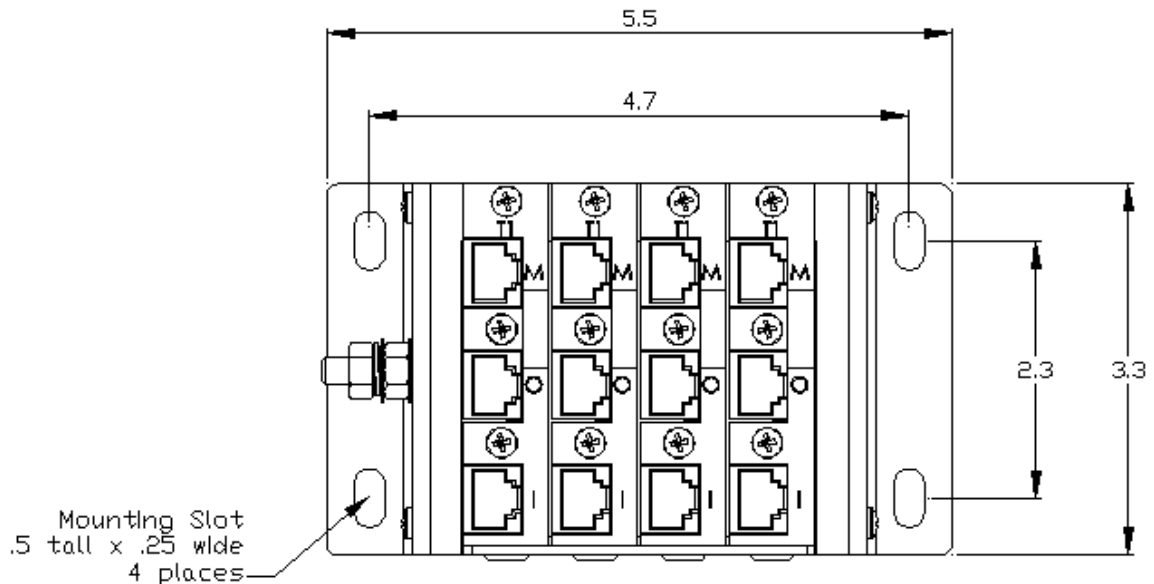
Optional Quad Chassis Style (suppressor card assemblies not included)
